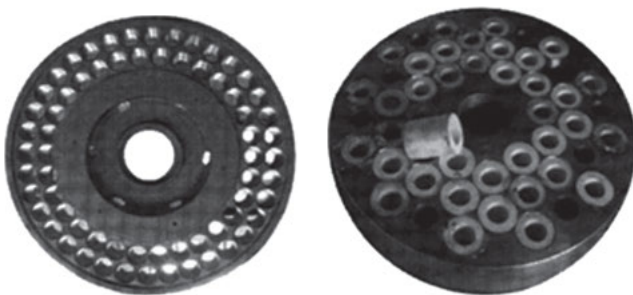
Flat die plate with double-row die holes. Nonmetallic sleeve flat die plate.
